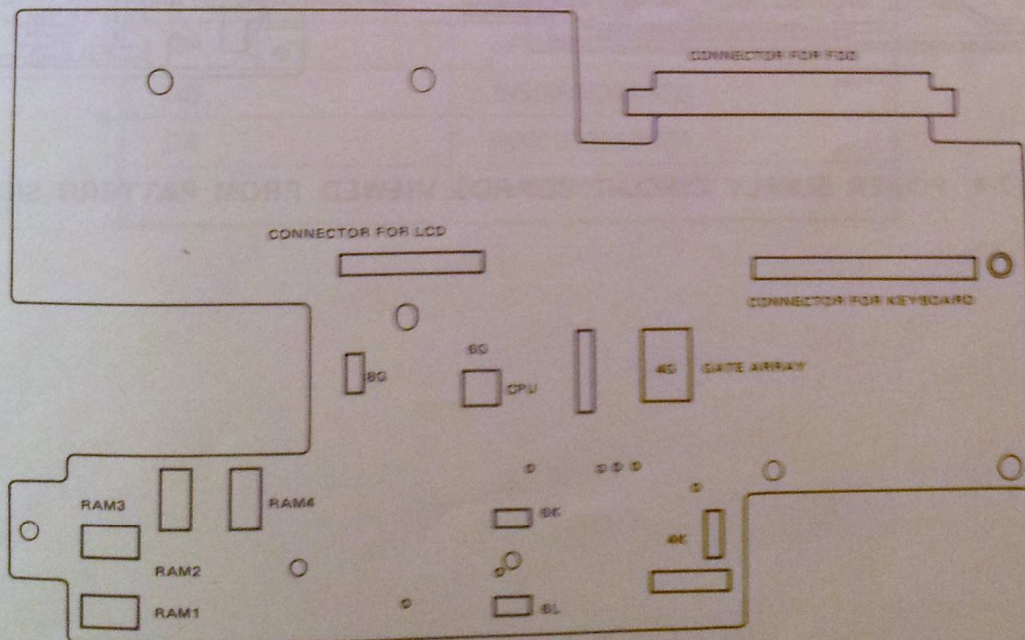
MAIN P.C.B. VIEWED FROM PATTERN SIDE
